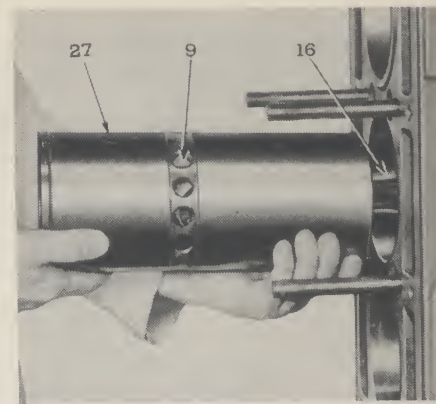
C—GM engine. Showing method of installing piston and rod assembly with the cylinder liner.
